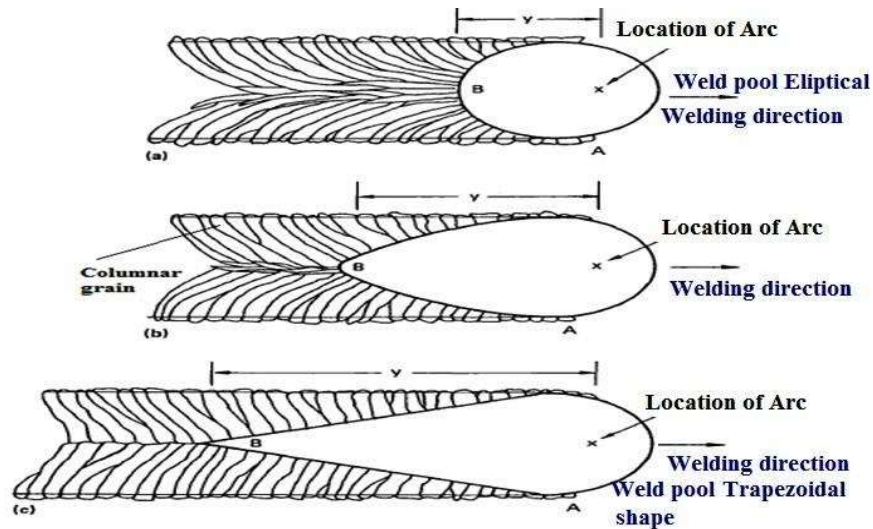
Types of grain morphologies that can form in fusion welds [57]
